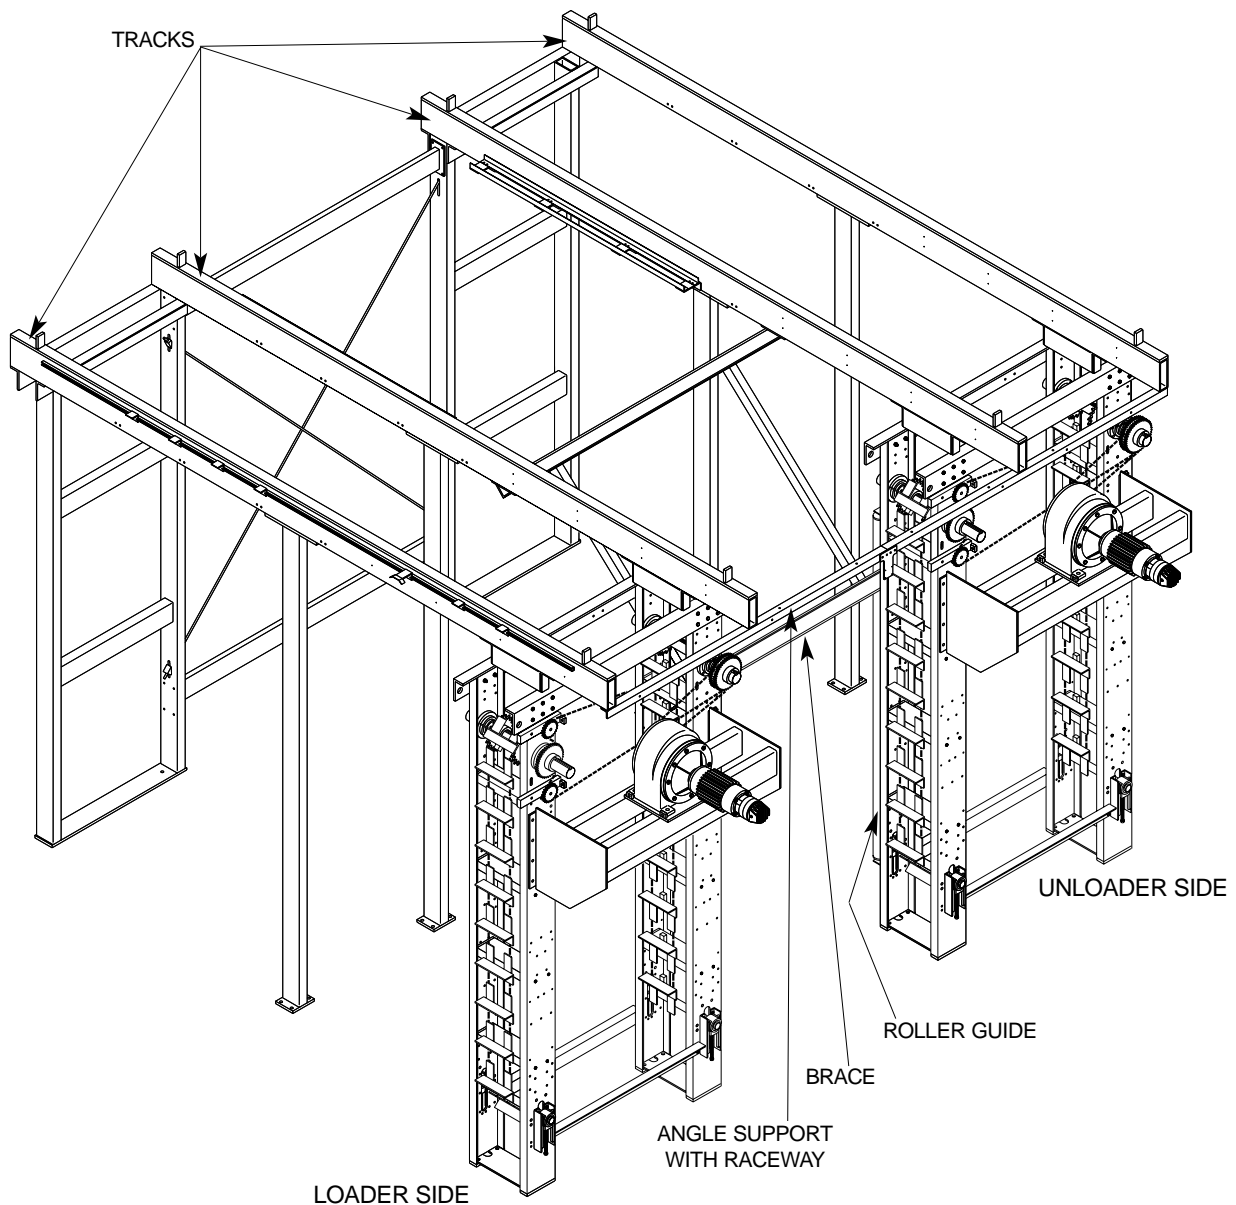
ANCHOR CROSS CHANNEL TRACKS, ANCHOR BRACES, ANGLE SUPPORT WITH RACEWAY AND ROLLER GUIDES.
